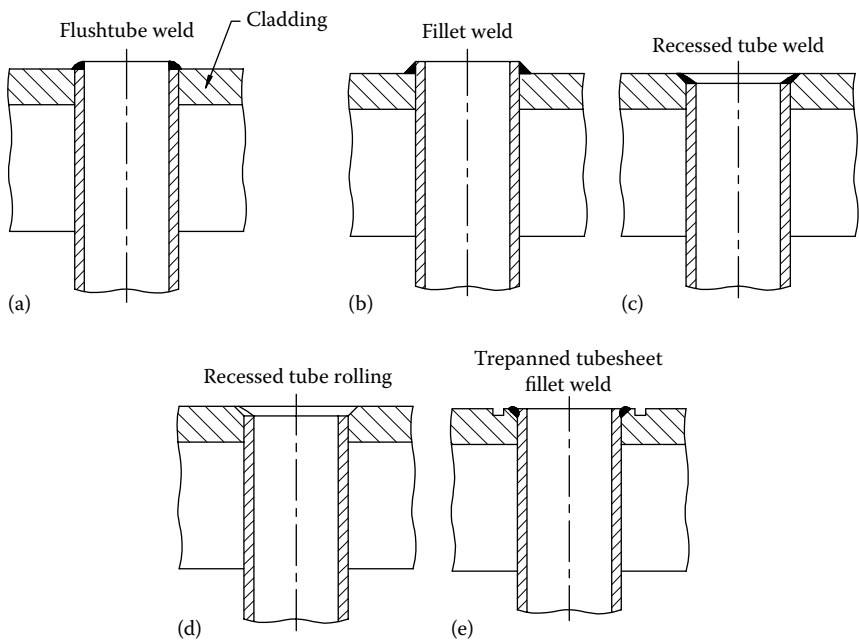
Tube-to-tubesheet joint configuration for welding of clad tubesheet.
